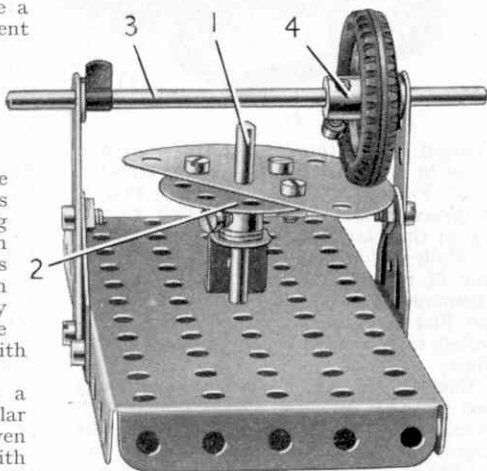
A simple friction drive intermittent motion mechanism that requires only a few parts in its construction.
